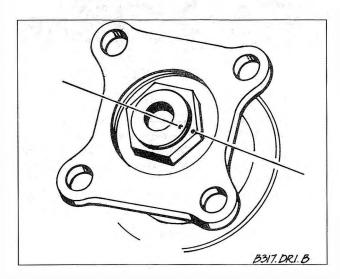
Final drive input shaft, collar nut, and flange, showing matching marks made with punch.
